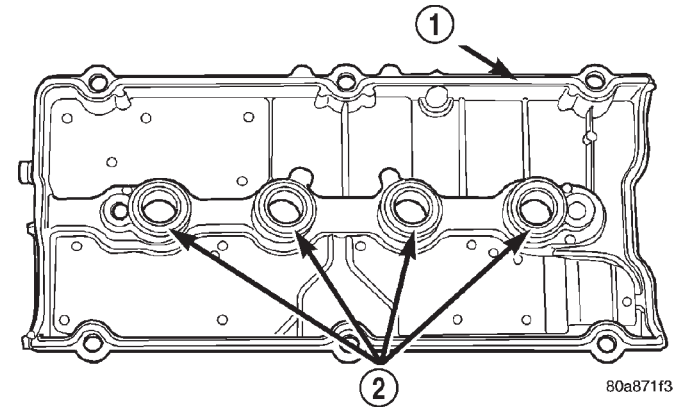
Cylinder Head Cover Gasket and Spark Plug Seals
